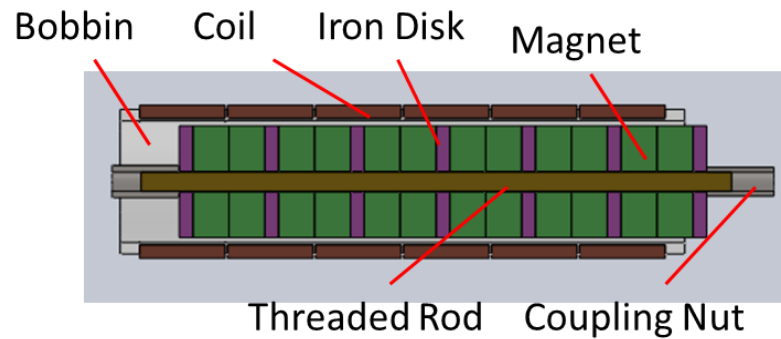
Magnet assembly and coil sectional view, rotated horizontally. The iron disks at each end must be removed if repelling magnets are to be used in place of a spring, as the iron disks would attract the repelling magnets.
